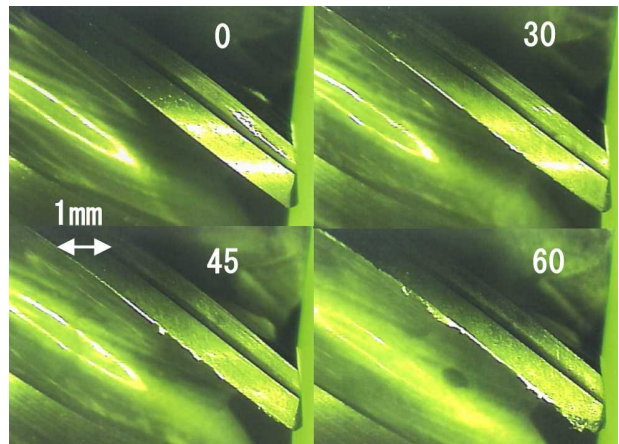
Photographs of cutting edge (Unequal helix Angle Endmill (C) Workpiece: SUS304)
